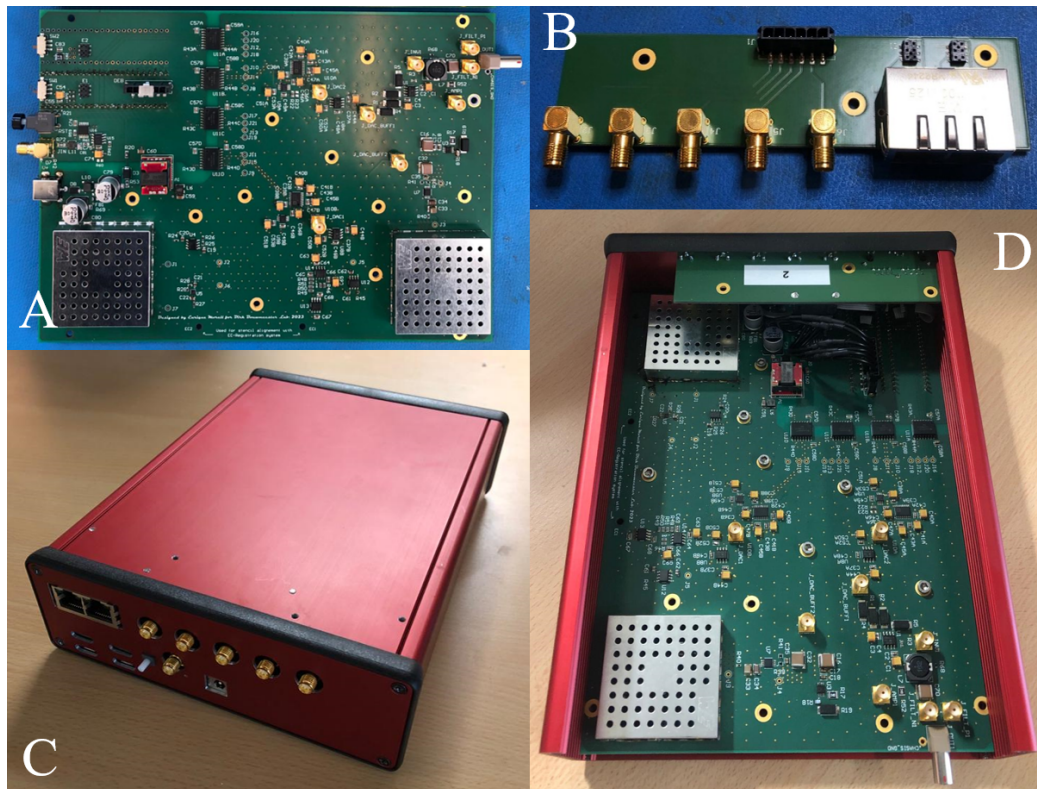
Photographs of the lockbox and I/O extension board. The assembled main PCB (A), the assembled I/O extension PCB (B), the front-panel of the assembled lockbox (C) and the inside of the lockbox with the I/O extension PCB installed (D).
